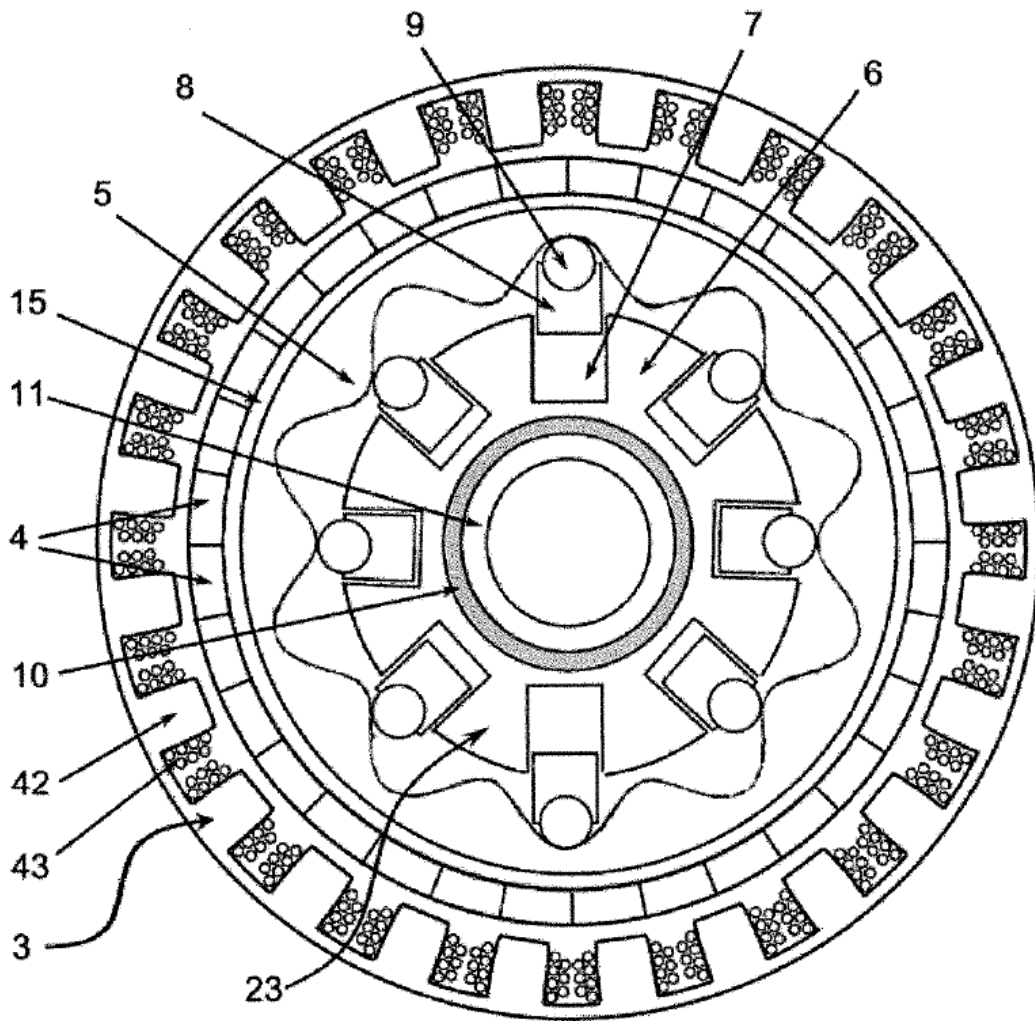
TWINTORQ MOTOR PLANE CROSS SECTION [12]
